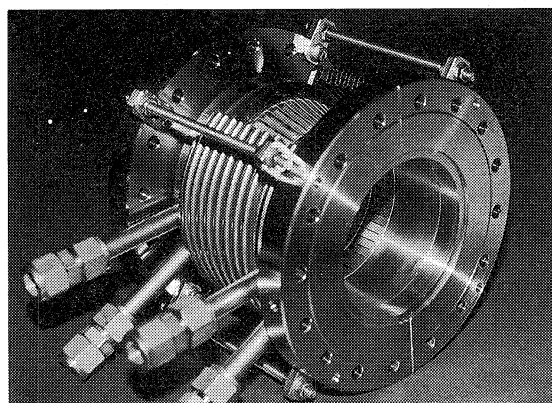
Cut-model of bellows assembly drawn in Fig.1.
